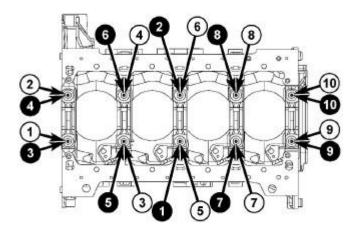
CRANKSHAFT Courtesy of CHRYSLER LLC
